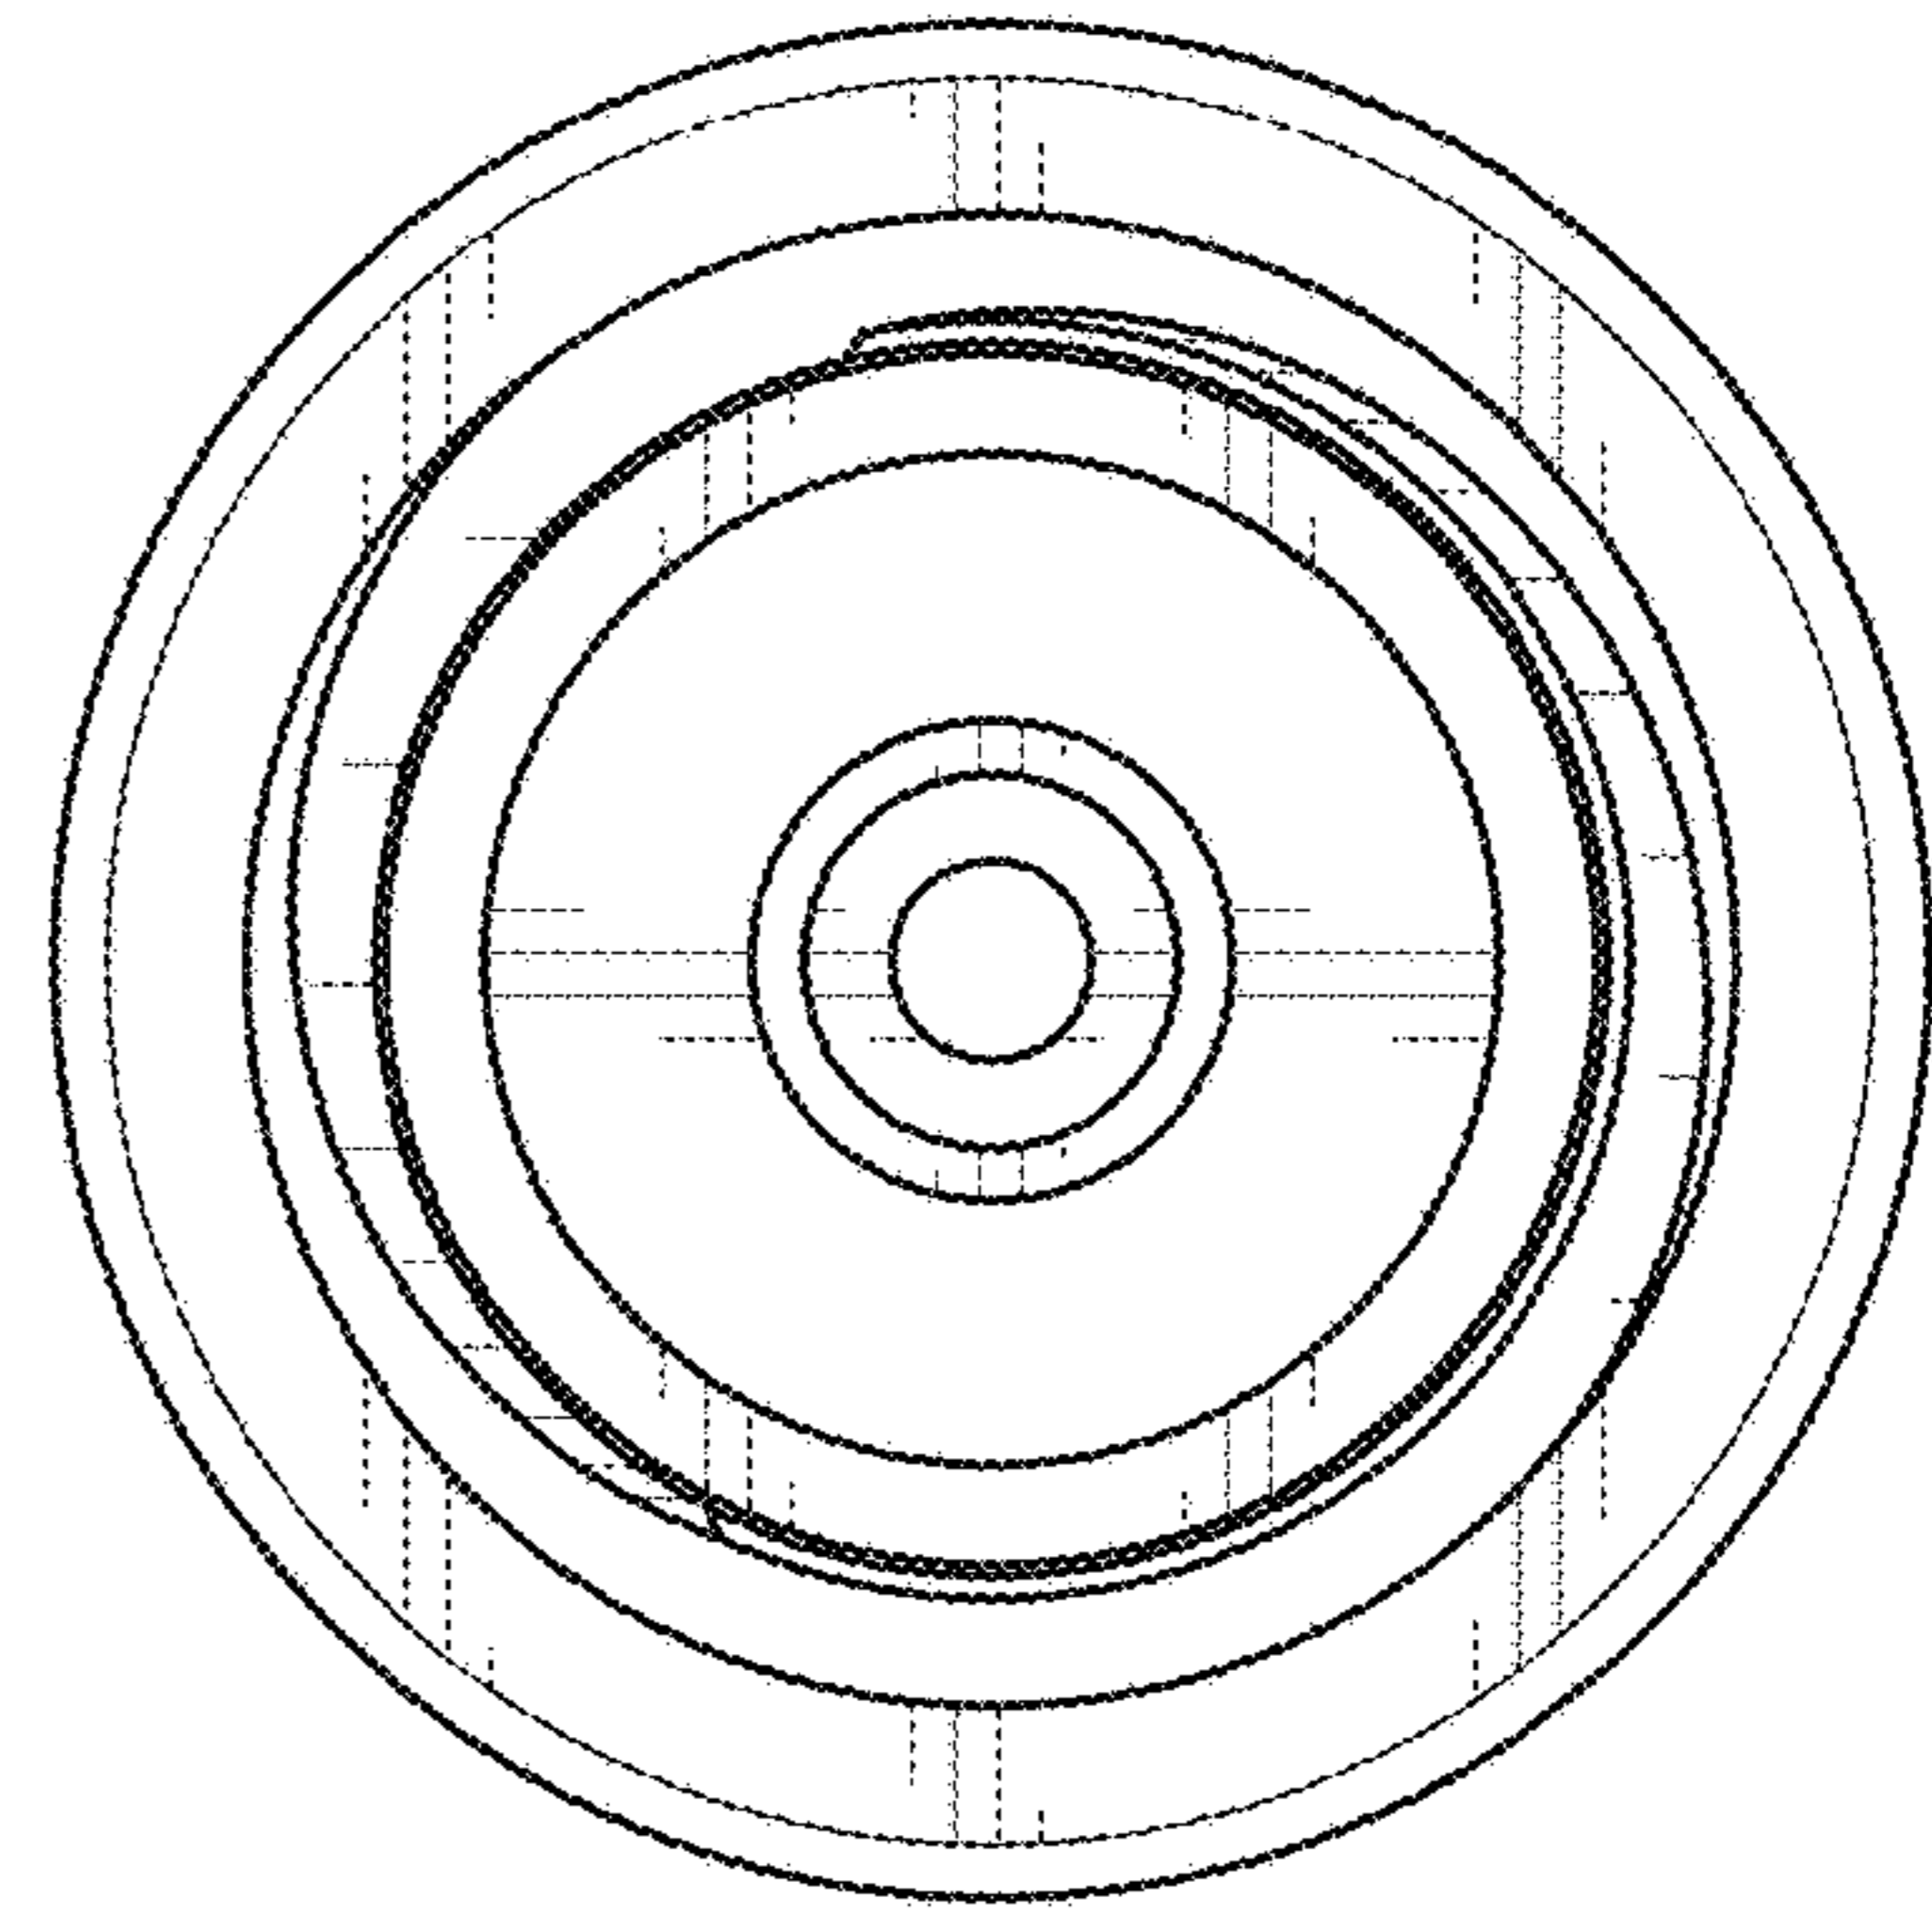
is a perspective view of a design for a liquid cooled plasma torch electrode;
